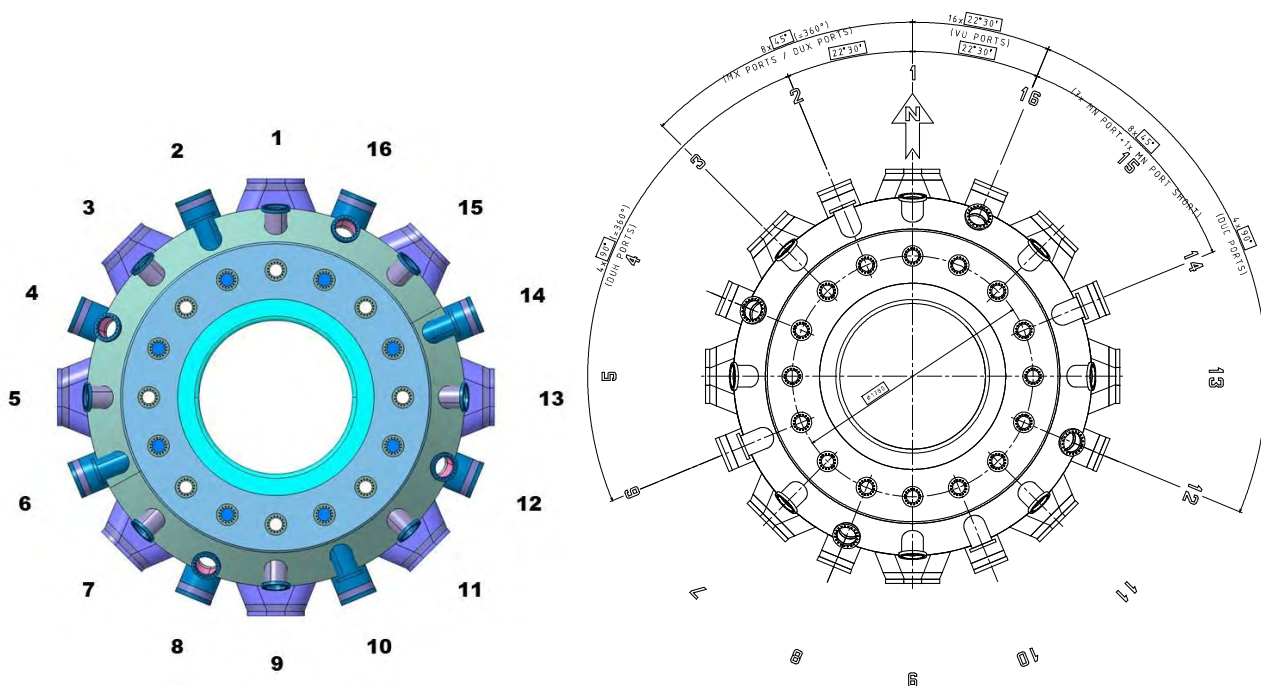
Left: VV main body weldment top view with numbers representing the different VV sectors. Right: VV ports layout.
